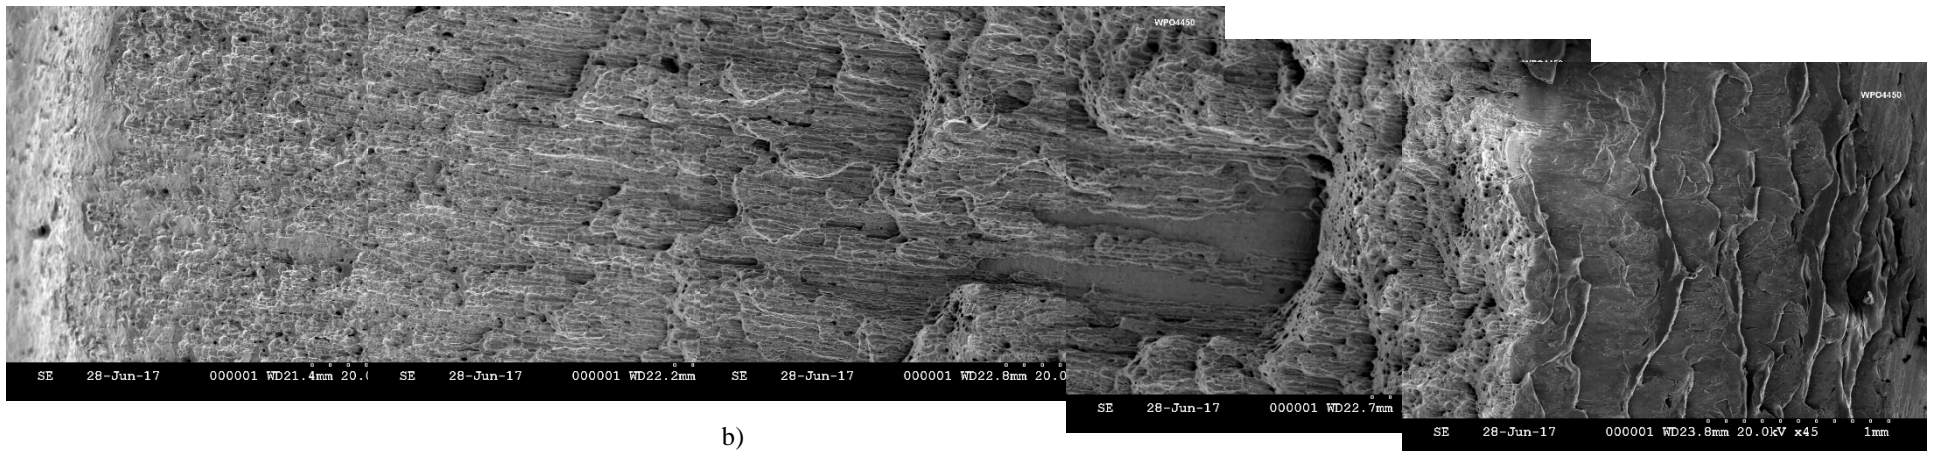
Showing fracture surface and method to determine the bond length for a burst tested sample.
